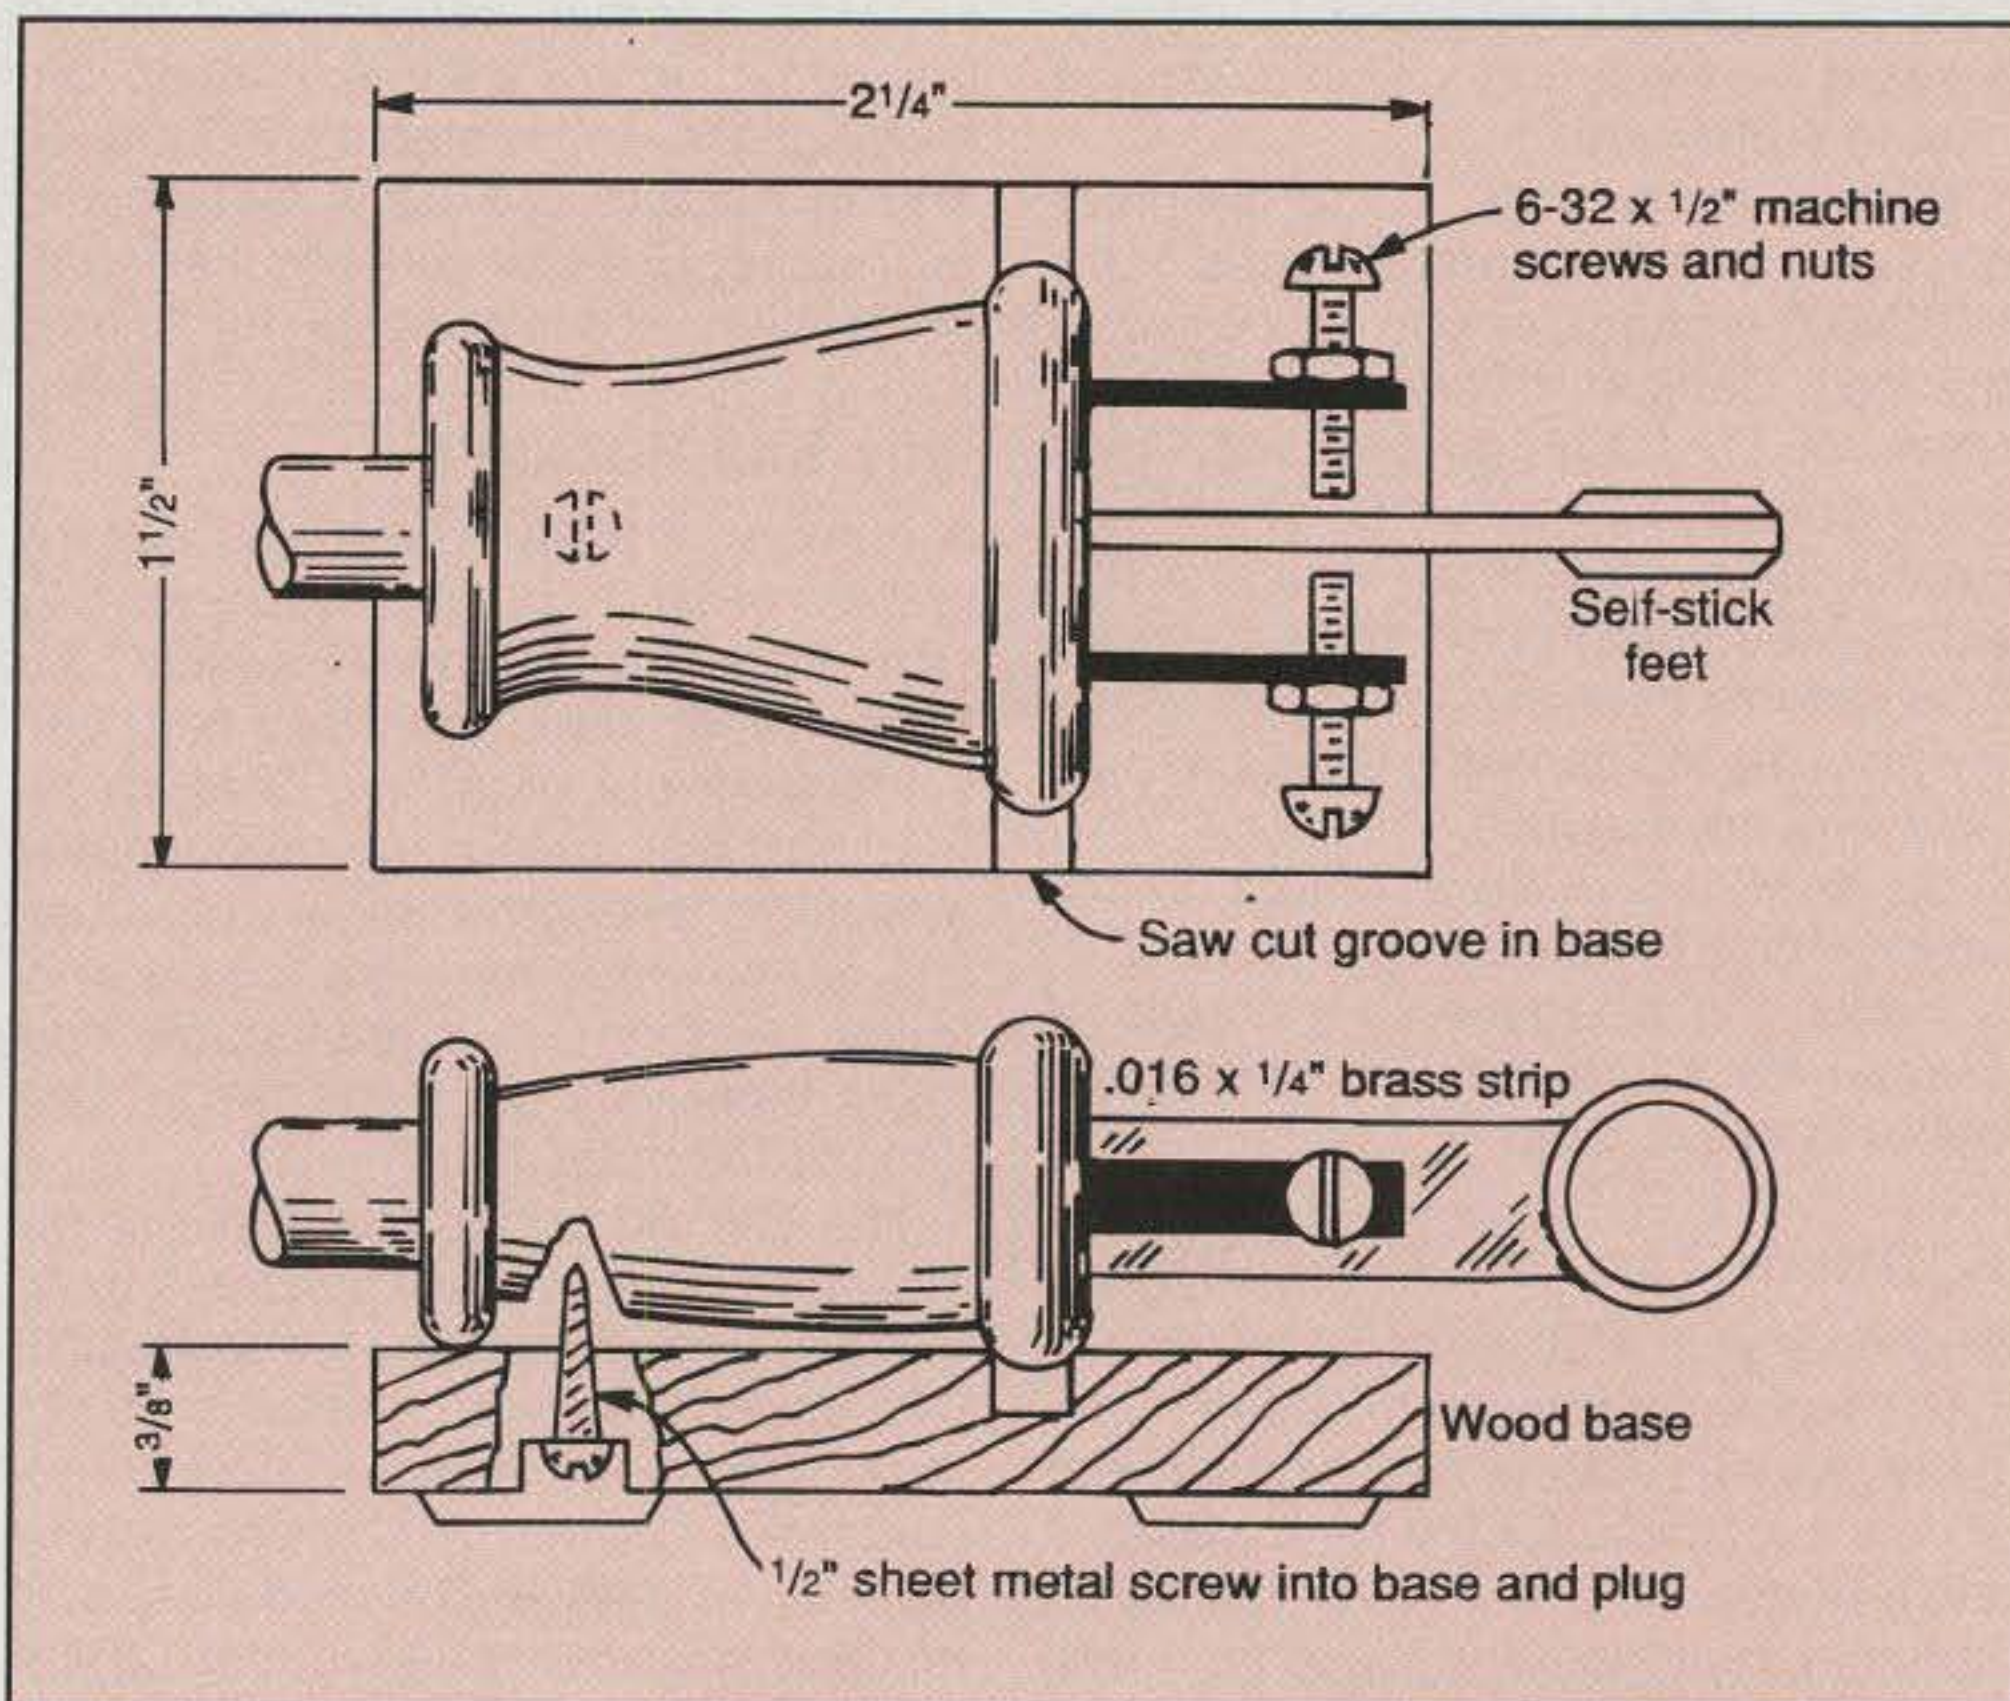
Assembly outline of the N1UIY power-plug paddle. Even if you could resist making your own copy of this gem (which I doubt!), I'm sure you will never look at an AC plug the same way again!
